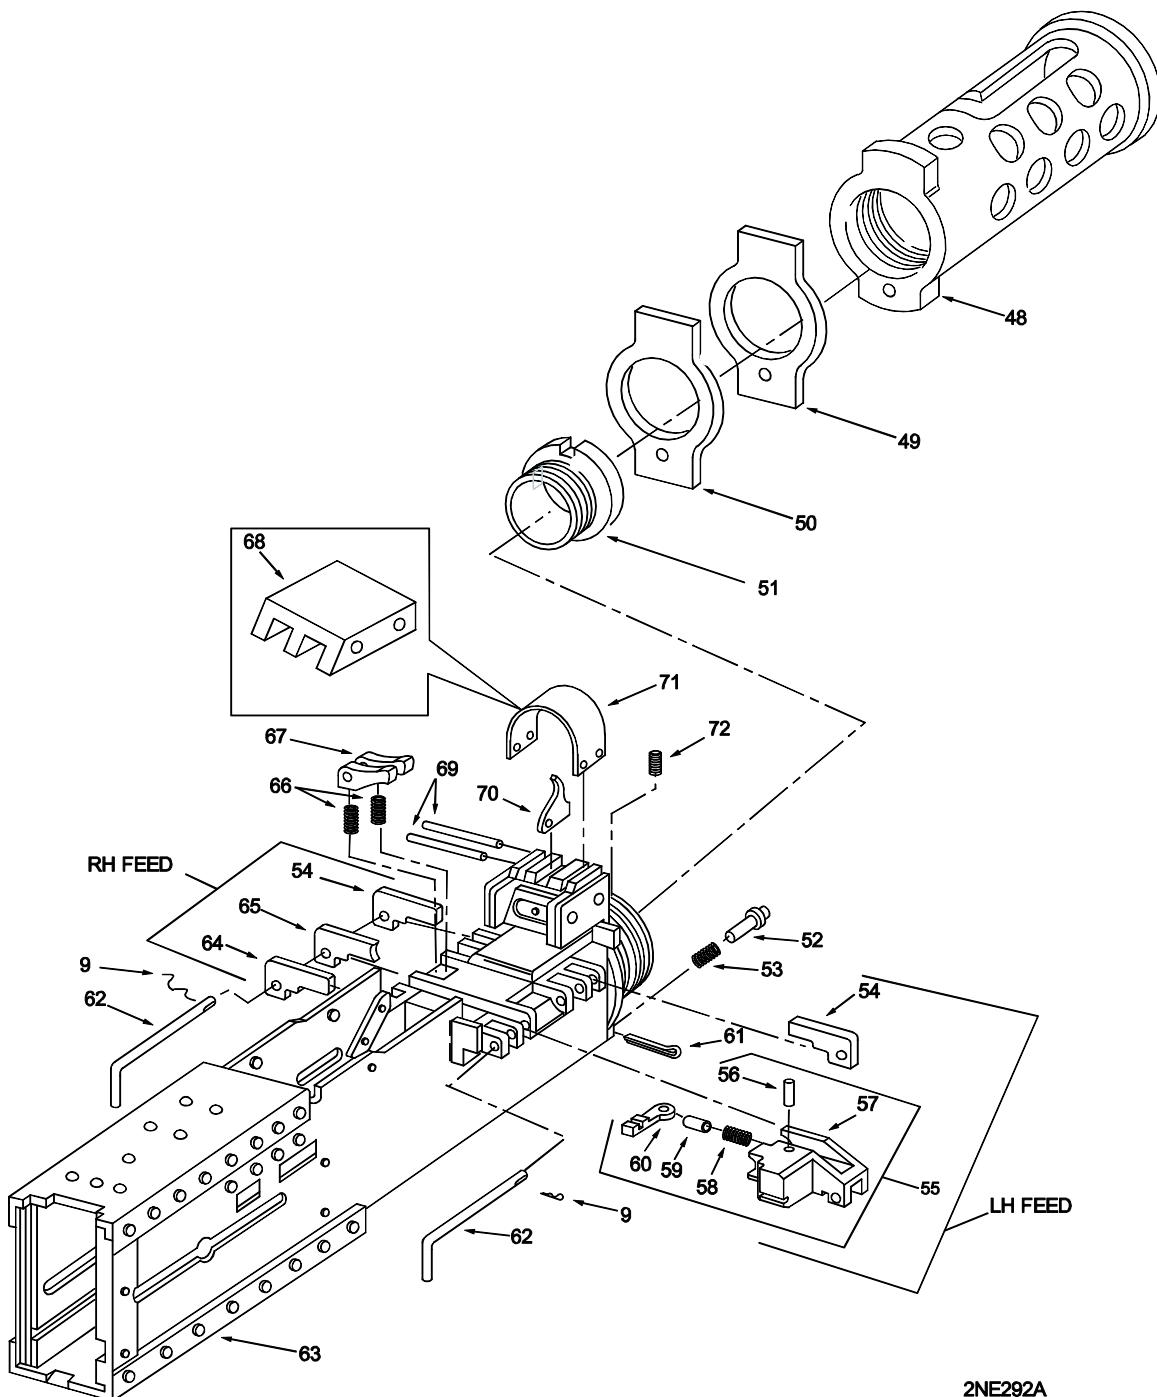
Machine Gun, Cal. .50, M2A1 13006168; Flash Suppressor 13027971; Stop Assembly Adjustable Trigger Lever 7265212; Latch Assembly, Bolt 8448125; Stop Assembly, Cartridge, Rear 5577409; Barrel Support 13027972; Barrel Assembly 13027965. (Sheet 3 of 3).
